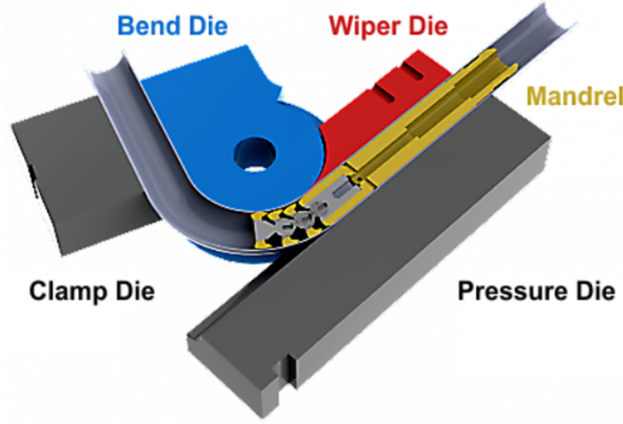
Setup representation of rotary draw bending manufacturing process [6].
